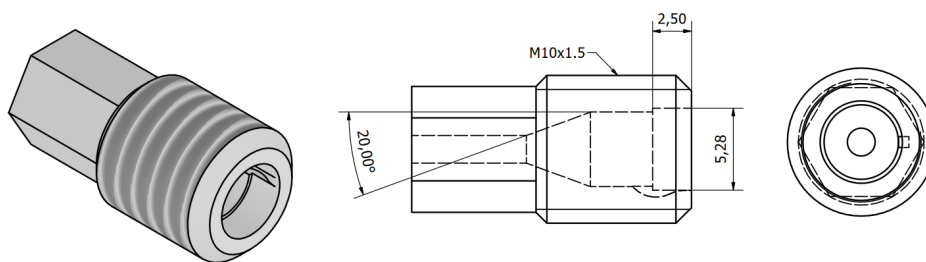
Drawing of the PZT element holder, with dimensions in mm
